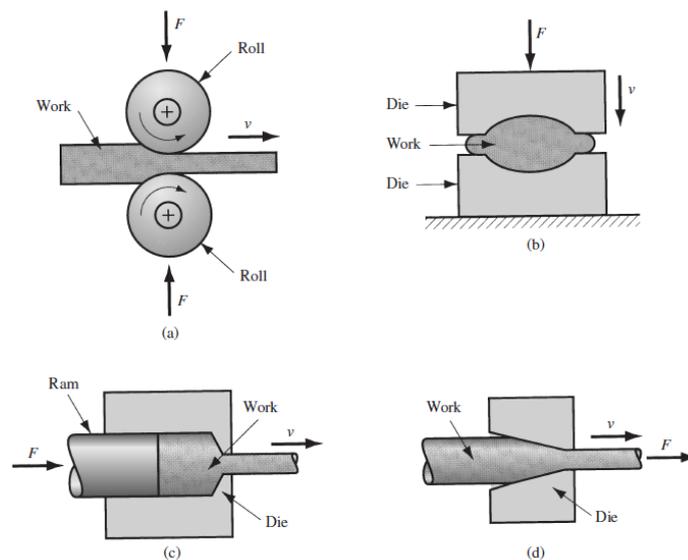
Rolling (a), Forging (b), Extrusion (c) and Drawing Processes (d)
